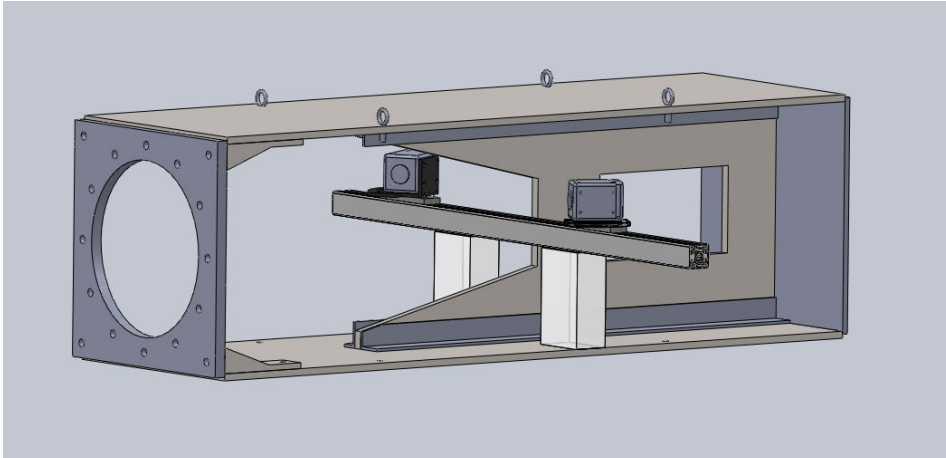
Schematic drawing of modified pendulum, showing internal arrangement (shroud removed for clarity)
